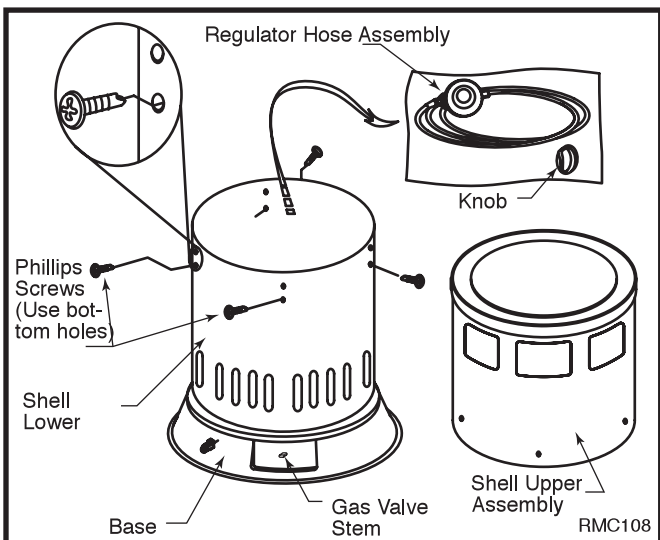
Remove regulator hose assembly, place four screws in bottom holes at top of shell lower.
